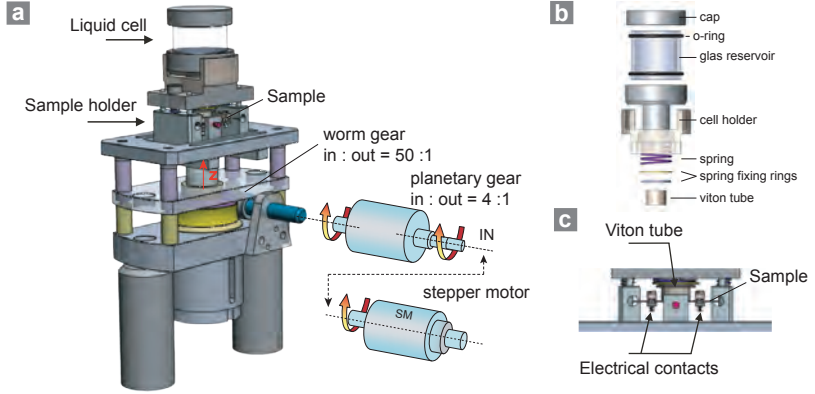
(a) The actual MCBJ setup composed of a liquid cell; a sample holder (with a sample inside); and a pushrod (red arrow) driven by a stepper motor. The movement of the stepper motor is reduced by a planetary gear and a worm gear; (b) Schematic of the liquid cell; (c) Zoom-in picture of the sample holder with a soft Viton tube through which the liquid cell is pressed directly on the sample and the electrical contacts of the break junction sample.
